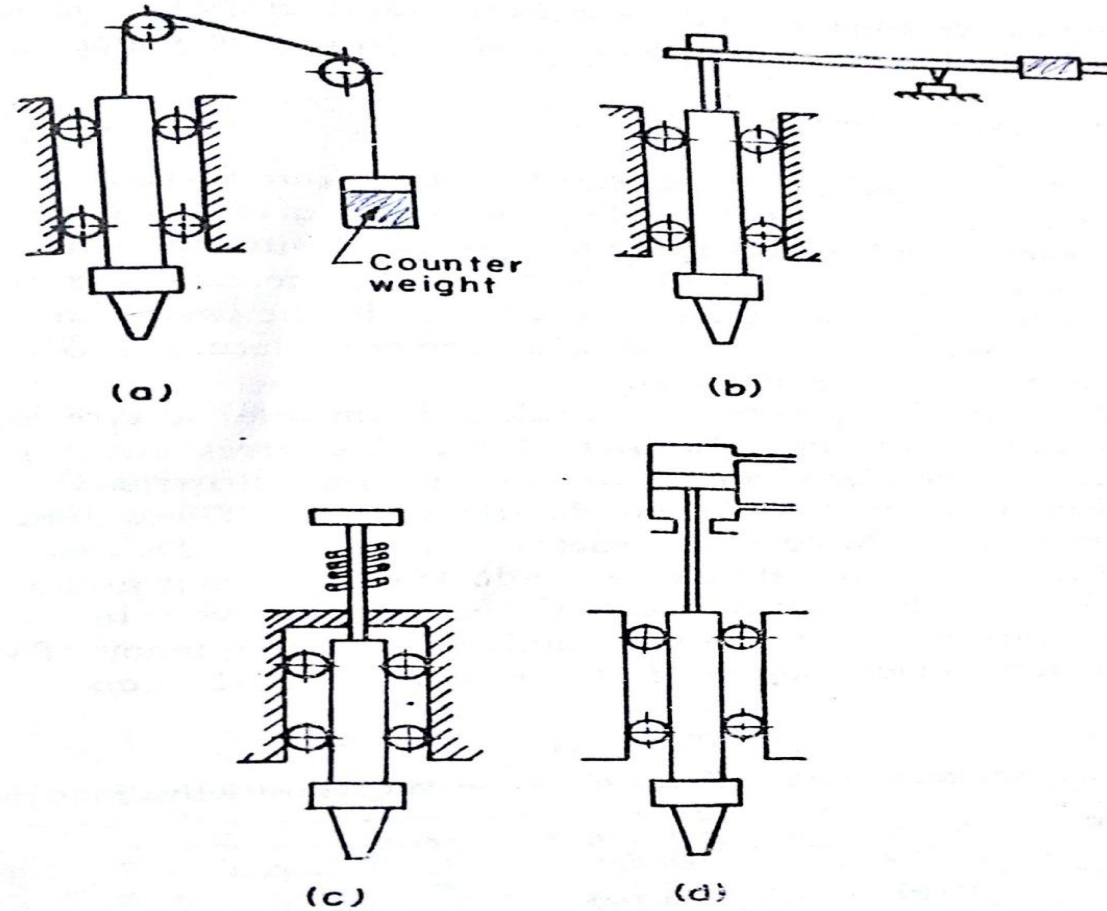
Schematic representation of some types of tool feed systems in ultrasonic machining
